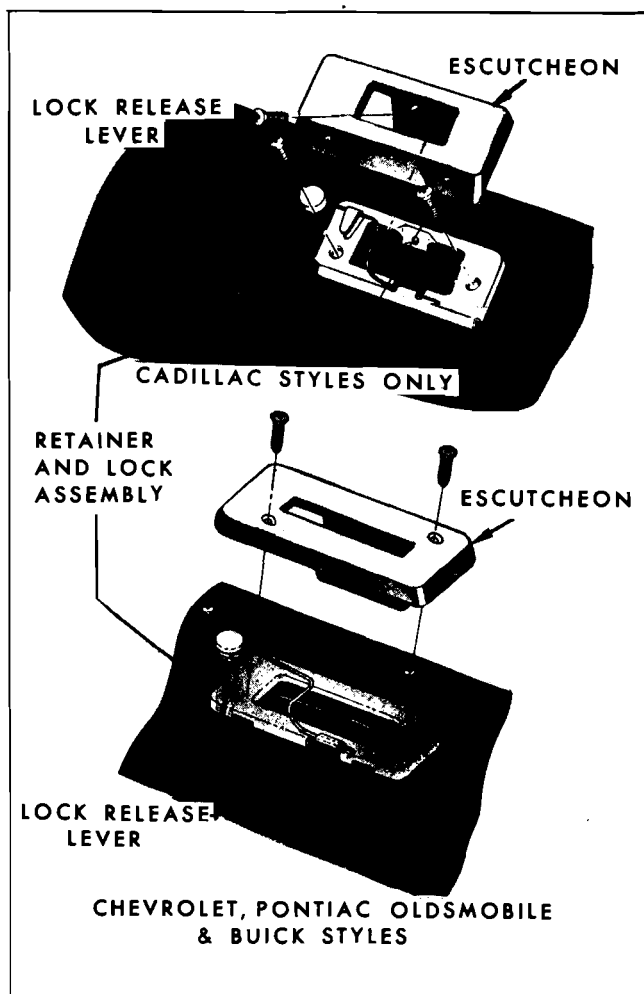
Front Seat Back Head Restraint Retainer, Lock and Escutcheon - Standard Seats
